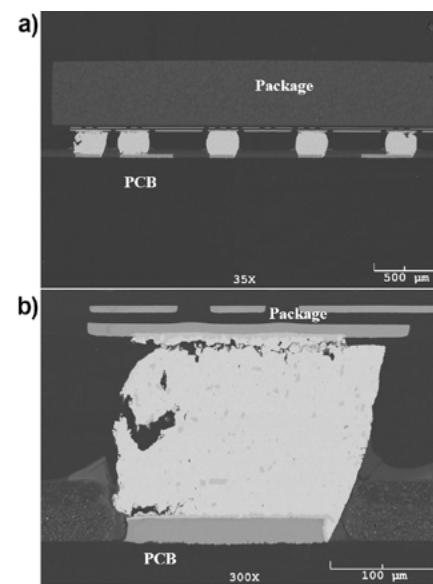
a) (top) Package cross section showing corner ball fail after BLR-TC 3164 cycles for SACB — no UBM DOE leg; and b) (bottom) Magnified corner ball cross section showing bulk corner solder ball cracking primarily at the package side, as well as some crack initiation at the PCB side.
